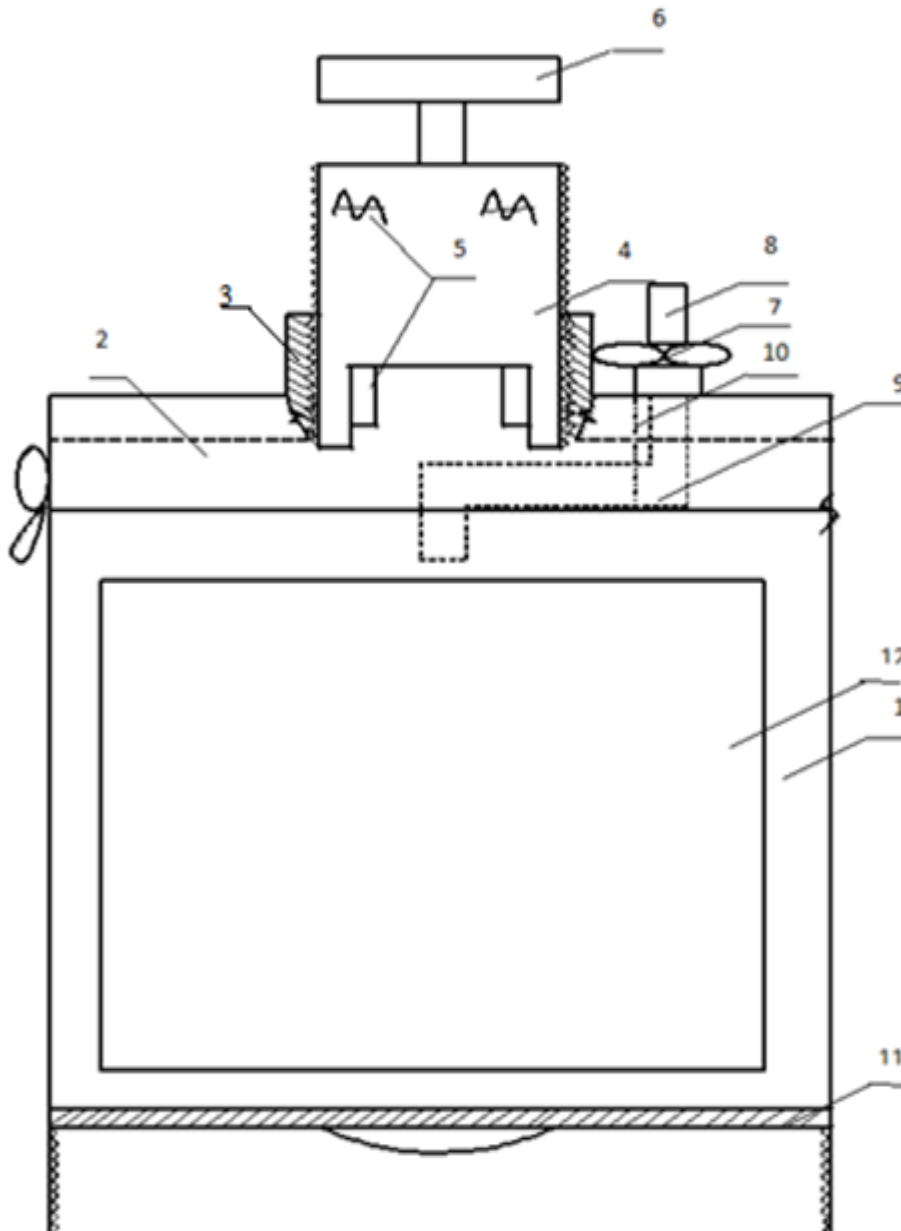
Schematic diagram of the machine for filling and closing svizhovydoyenoho milk 1 - tube; 2 - a cover; 3 - projecting neck; 4 - cylinder; 5 - screw clamps; 6 - handle; 7 - tap to control the amount of liquid filled in; 8 - trumpet; 9 - filler pipe; 10 - L-shaped hook; 11 - the bottom; 12 - the window to check the amount of milk poured.
